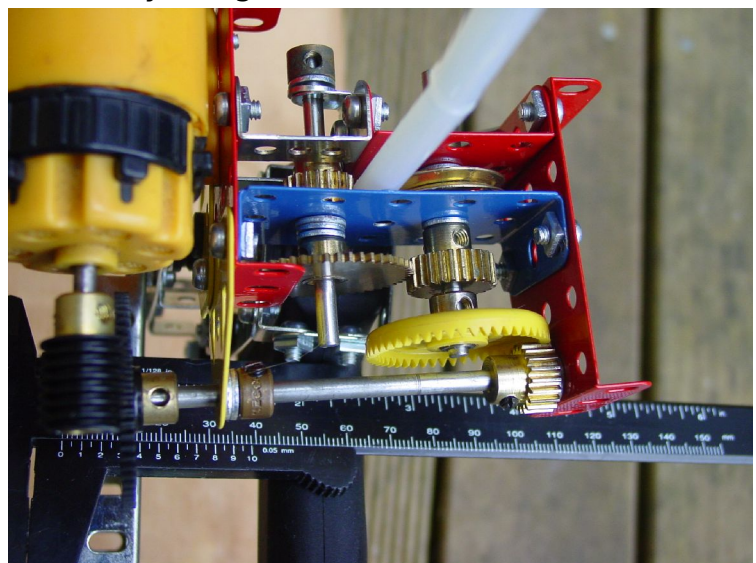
The internal workings of the extrusion head reduction gearbox. The worm gear on the left does in fact engage sufficiently.
